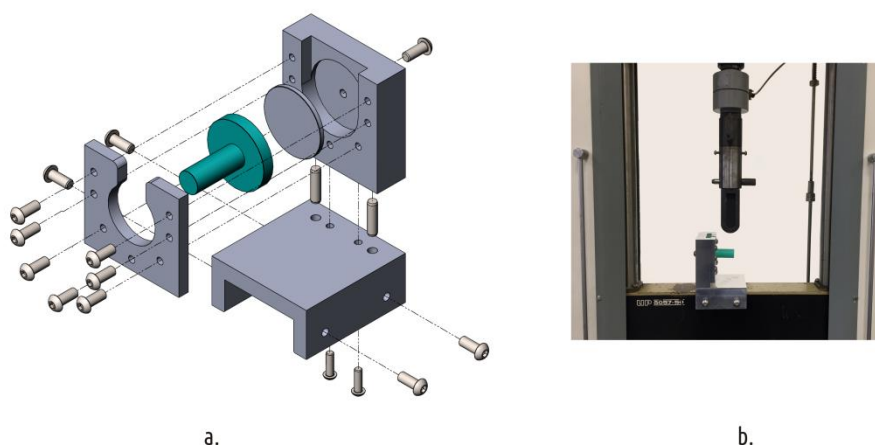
Sample fixture (a) installed on the universal testing machine (b)
